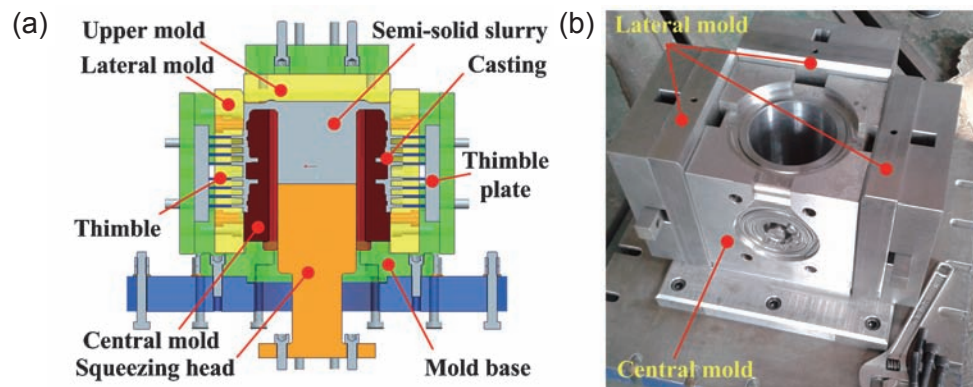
Schematic (a) and experimental setup (b) of the multi-directional squeeze casting mold of the scroll
